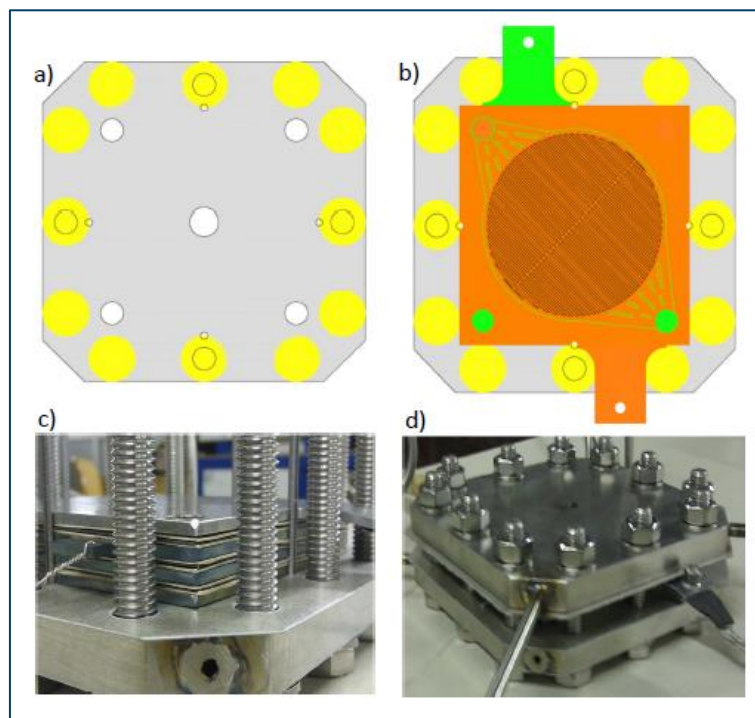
a) Drawing of the housing plates used; b) Drawing of the housing plate with the interconnector; c) Detail of bolts positioning during the prototype assembly; d) Prototypical stack after building completion.
